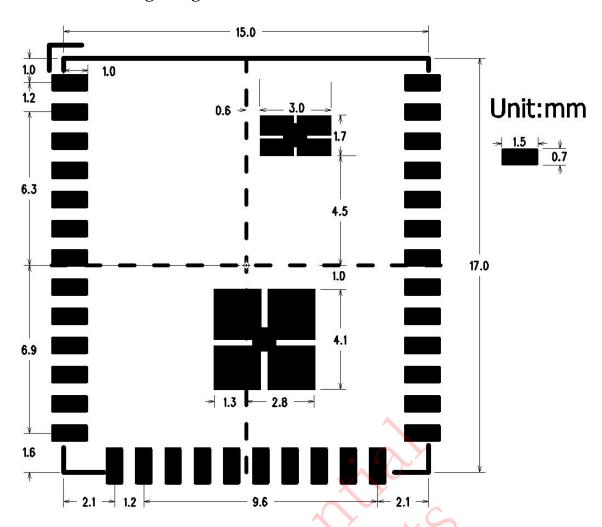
TX-AH-Rx00Pxx Module PCB Package Diagram
